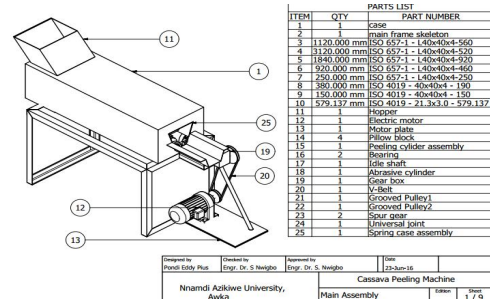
Diagram of the cassava peeling machine showing all the parts [4]
